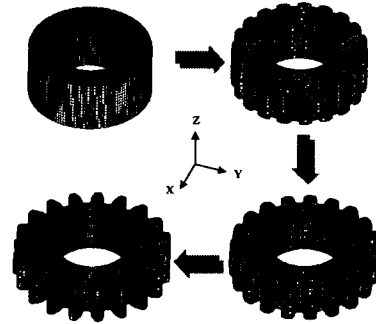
Intermediate deformations of the workpiece in closed die forging of gear with the same specification as Fig. 4
